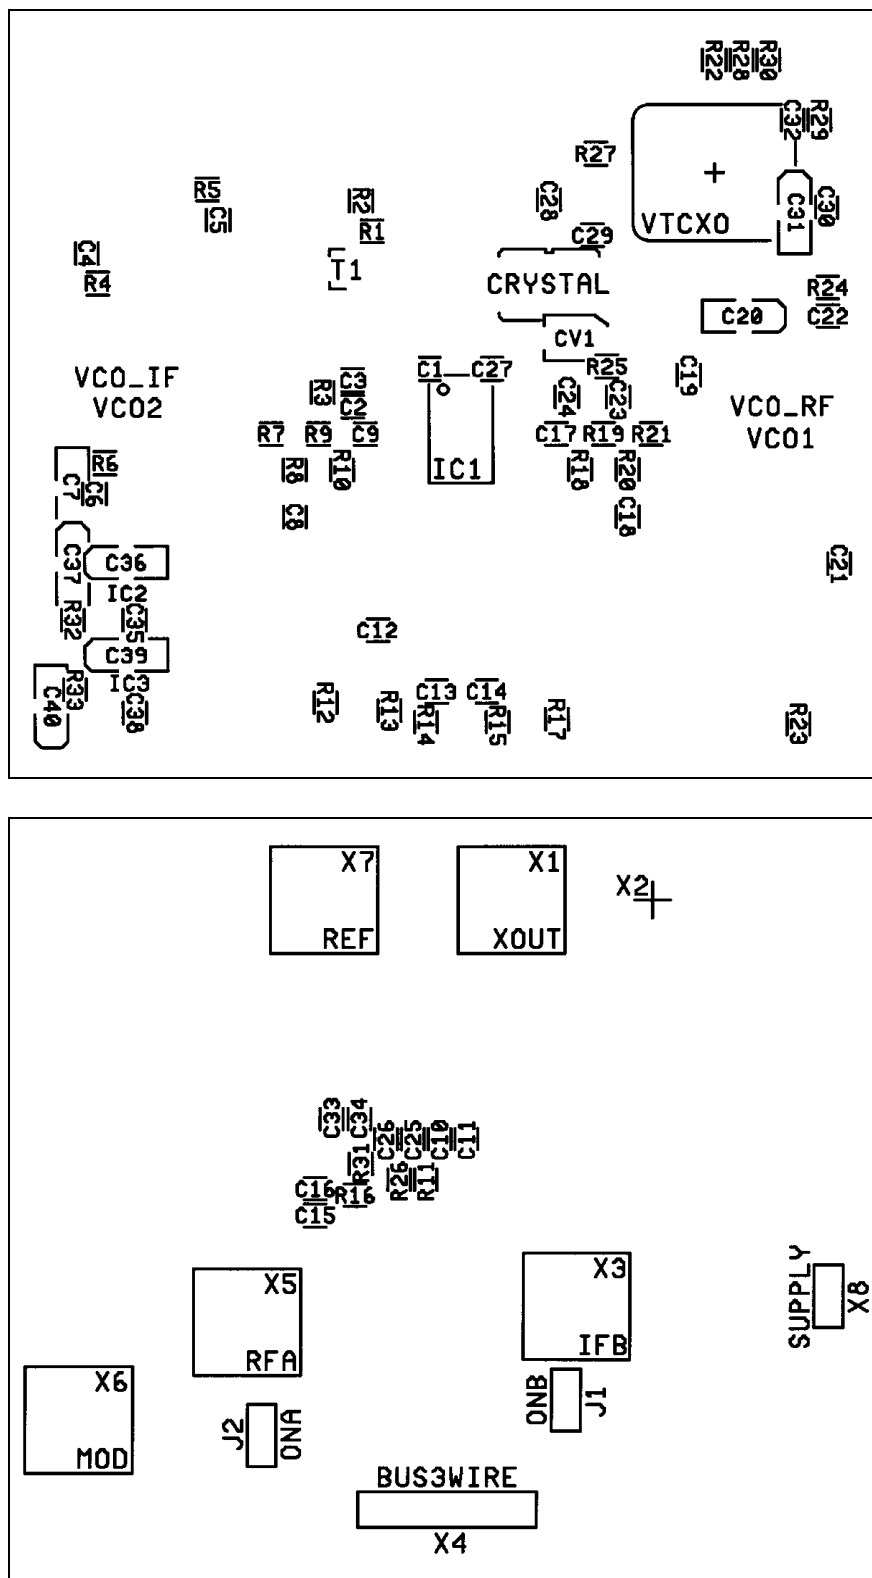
UMA1022M Demonstration Board Placement of Components.
